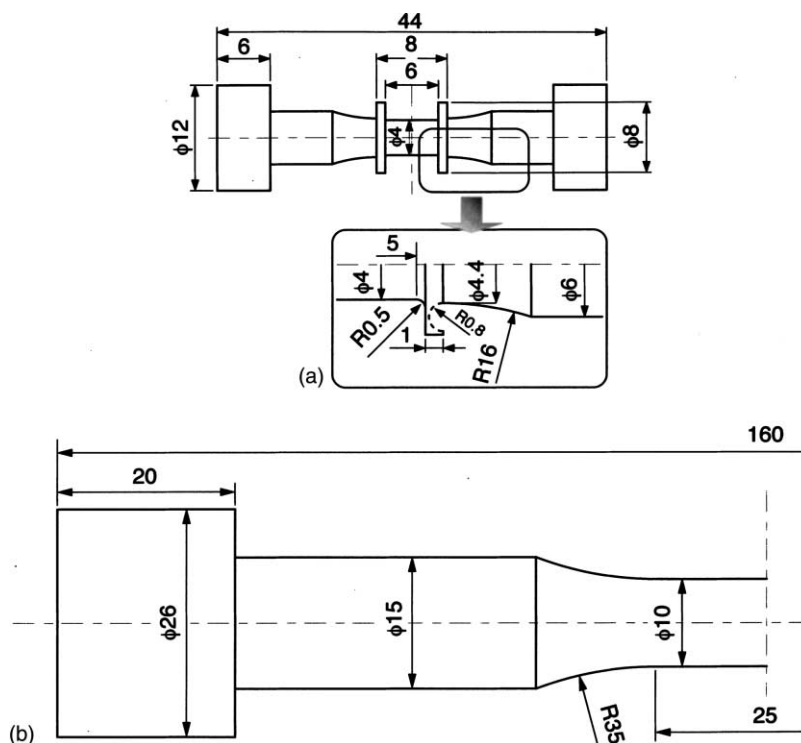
Shape and dimension of fatigue specimens (unit: mm). (a) Small-sized fatigue specimen designed for the present PIE in our laboratory. (b) Middle-sized fatigue specimen designed in accordance with ASTM E606 for the past PIE in our laboratory.
